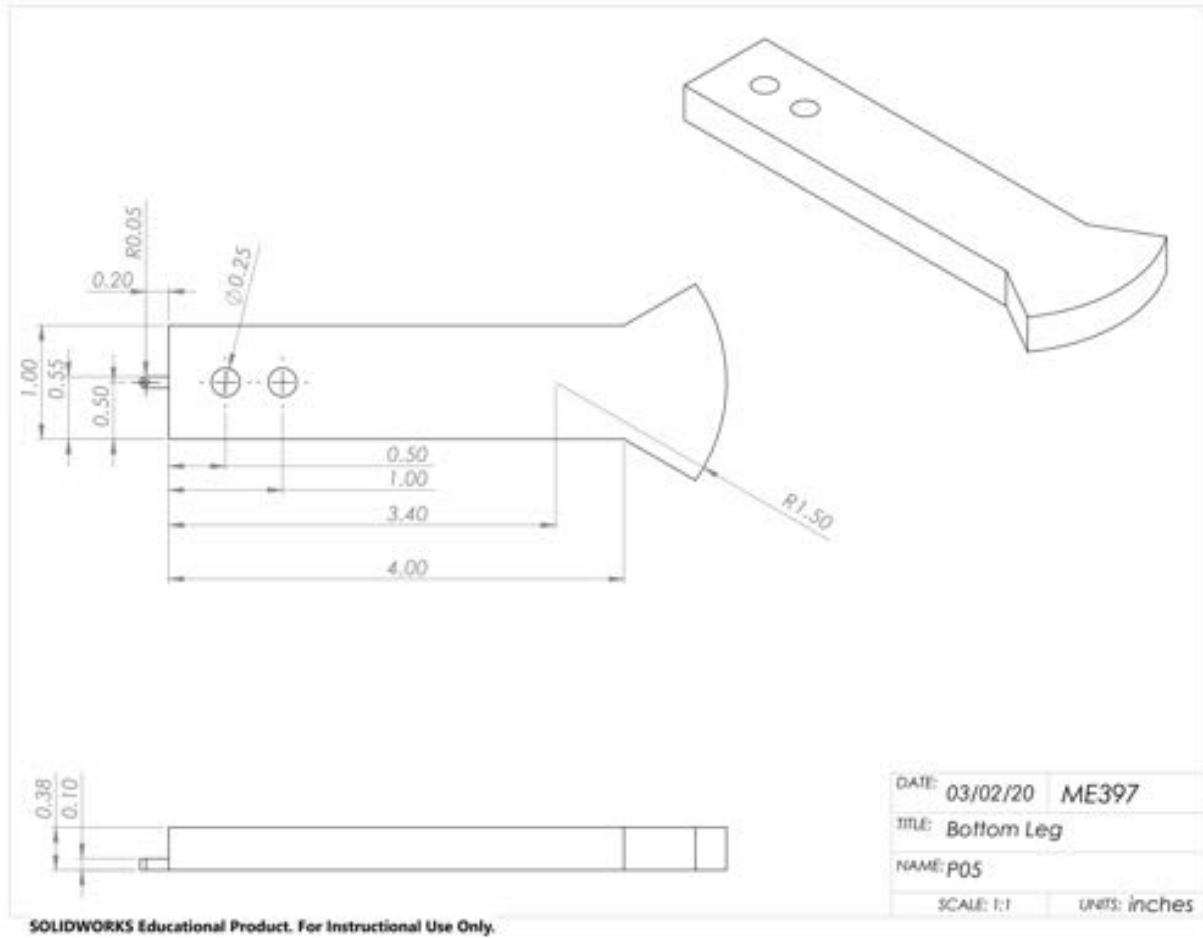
Drawing of the bottom leg for Model 1, Version 4
